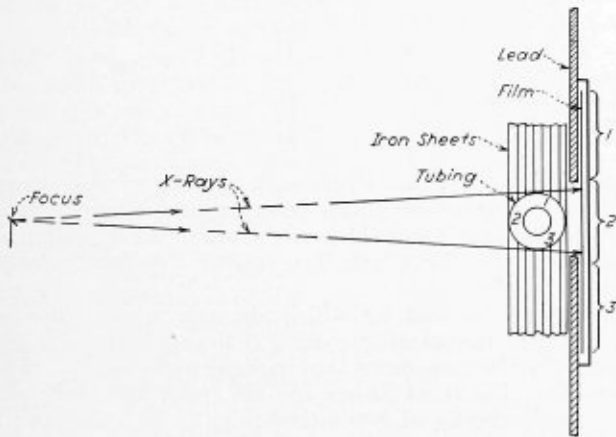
Radiographic arrangement for inspecting tubes of small diameter
